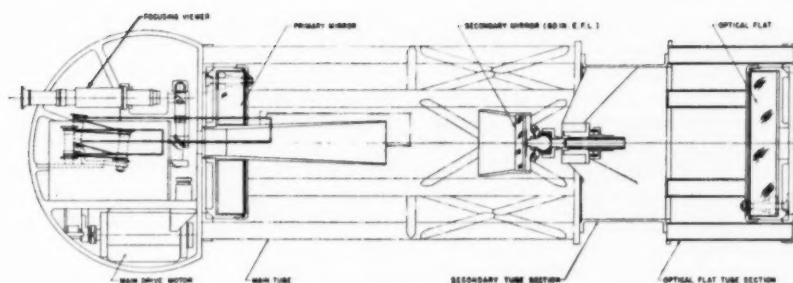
Side elevation of camera and main optical system (60-in. E.F.L.) with focusing attachment.
